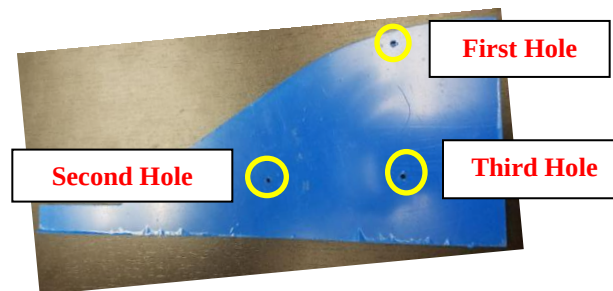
ROLL SERVO DRILL JIG SHOWING OUTBOARD DRILL POSITIONS
